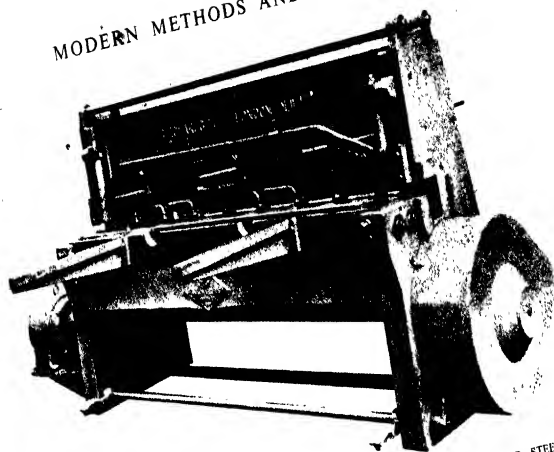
POWER-OPERATED GUILLOTINE SHEARING MACHINE FOR CUTTING MILD STEEL UP TO $\frac{1}{4}$ -IN. THICKNESS (F. J. Edwards, Ltd.)
